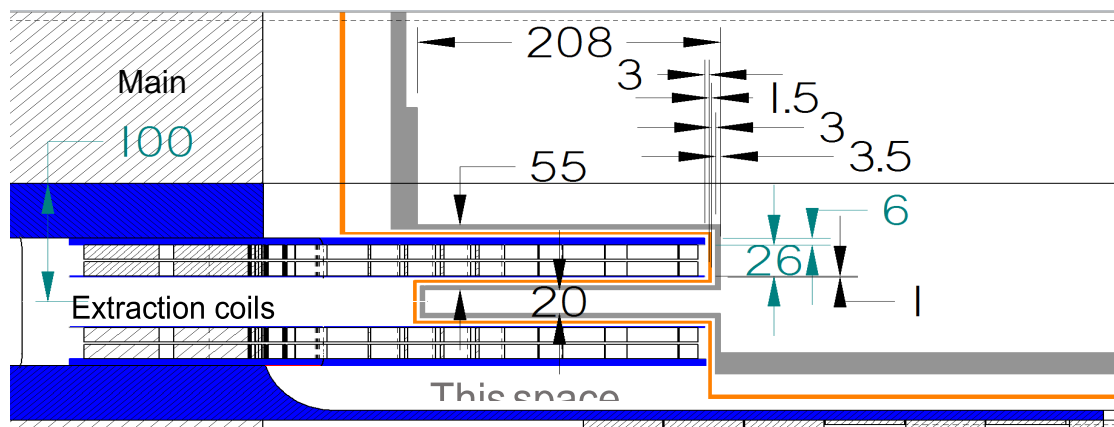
Close-up section view of the cryostat details near the beam extraction coil
